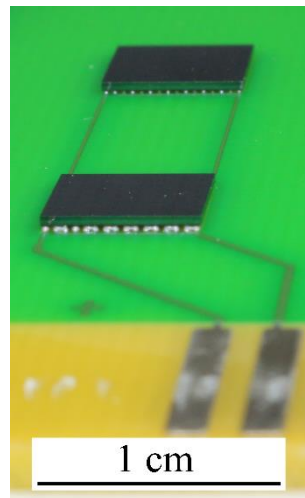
Test pattern of two BGAs each soldered onto a comb pattern layout on a standard FR-4 board.
